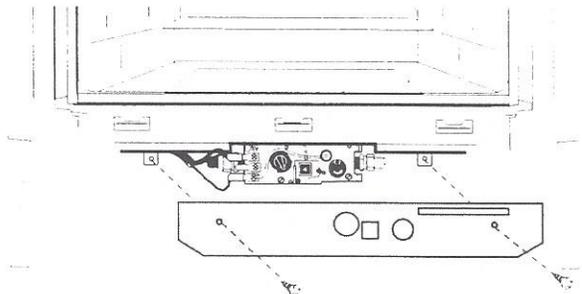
Replace the valve cover plate with two bolts and two nuts.
